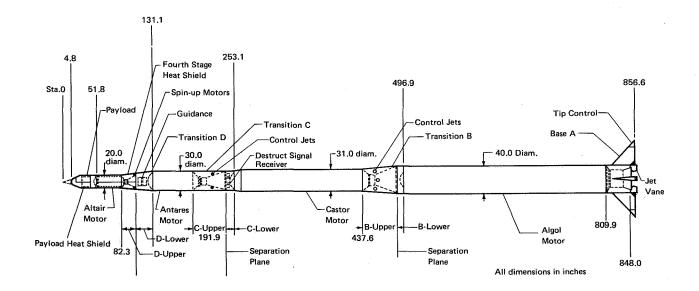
Drawing showing general arrangement of Scout test vehicle.
